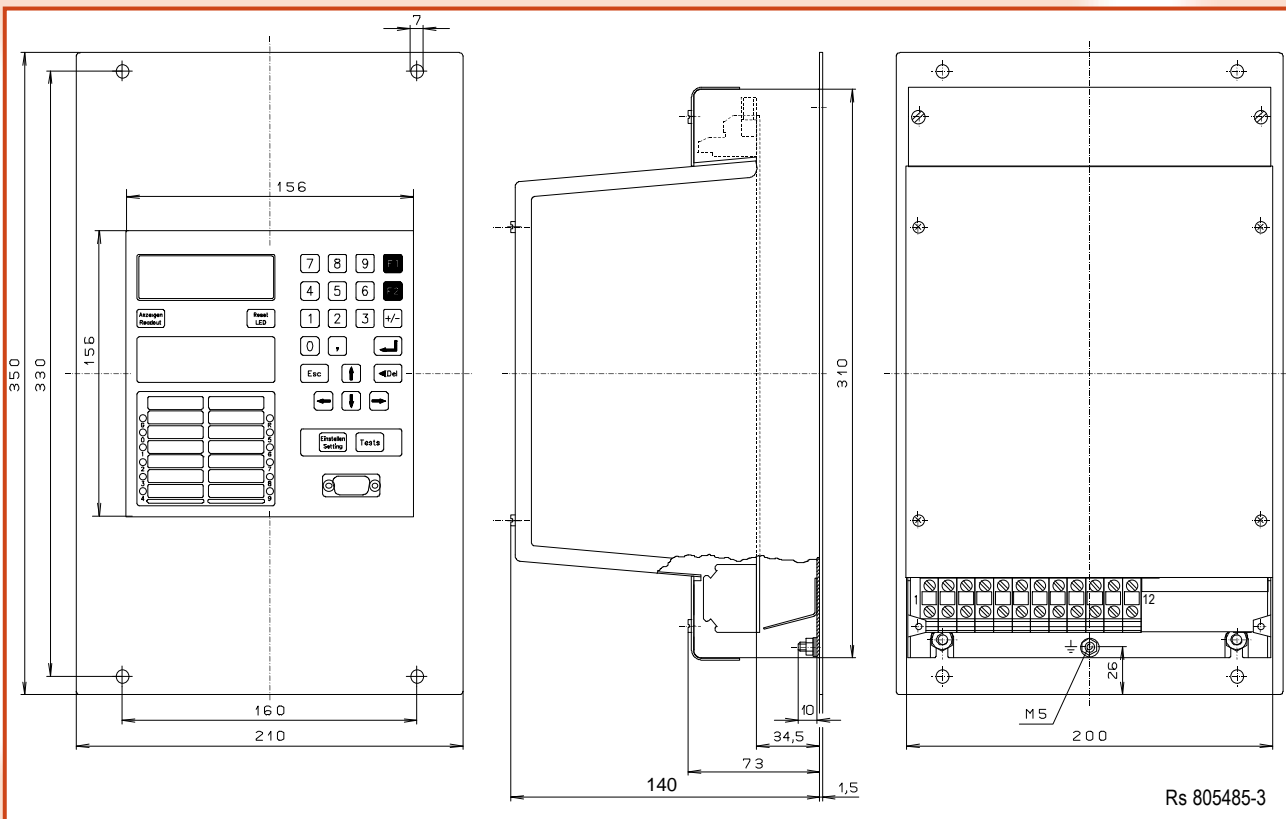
DM 2 housing for panel flush-mounting, lower terminal cover not shown in rear view (right-hand side). The panel cut-out should be 202 mm * 312 mm when device will be put through from front side. With the horizontal models the keypad is turned + or -90°.
